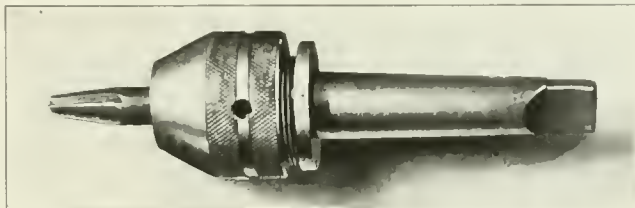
Special Cutter Chuck for the Die-sinking Machine
